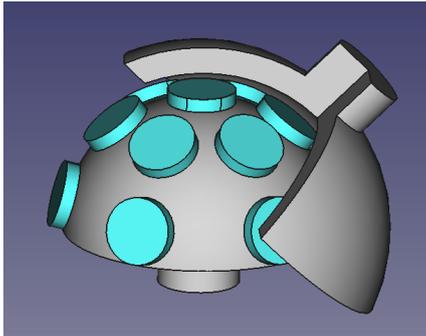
A convex mounting block with lens blanks attached. Above them is a section cut of the grinding block that grinds the curvature into one side of the lens blanks. Another block pair is needed for a different curvature.
